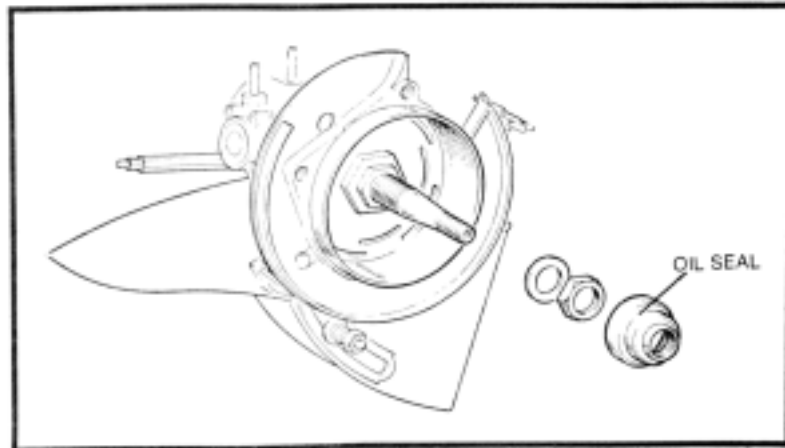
Work the oil seal off with your fingers, being careful not to tear it on the crankshaft threads.
